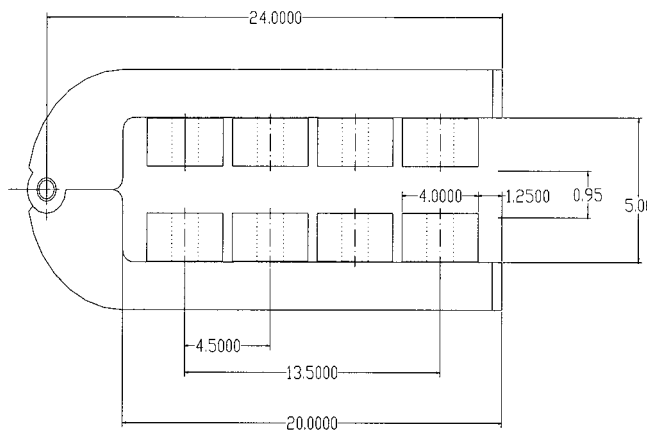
Schematic drawing showing the dimensions of the grasper with cylindrical projections. All dimensions are in millimeters.
